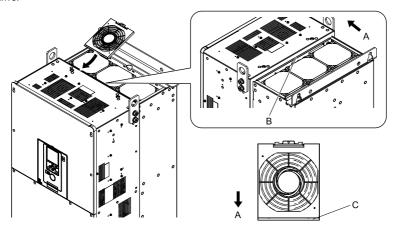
Put the Cables and Connectors in the Drive Recess
